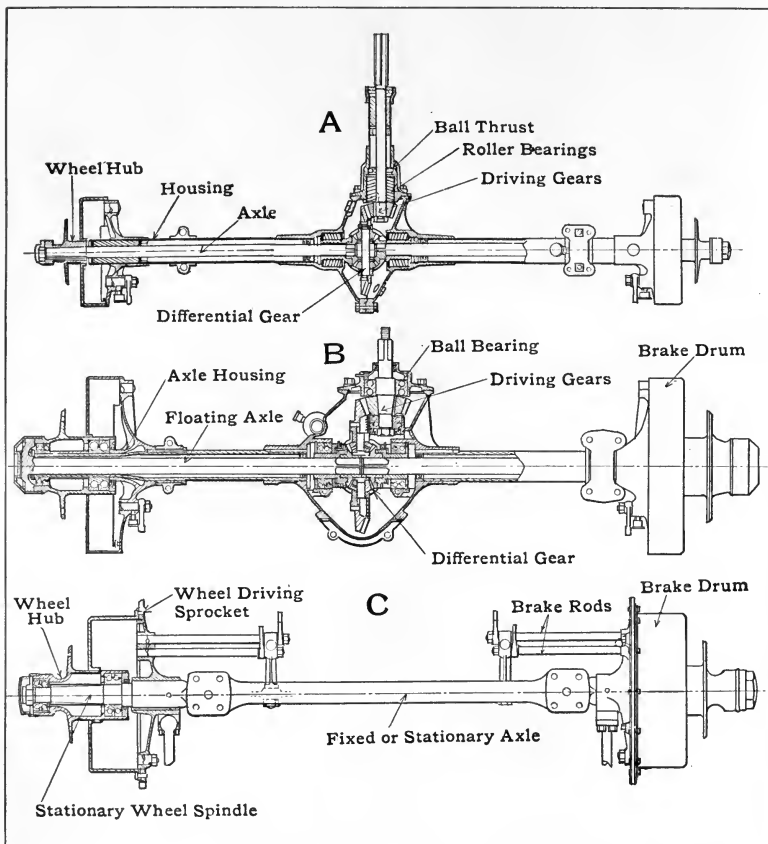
Rear Axle Types Generally Used. A—Live Rear Axle Using Shafts which Transmit Power and also Carry Weight Equipped with Roller Bearings. B—Full Floating Type Bevel-Gear Drive Axle. C—Stationary Axle with Chain Drive to Free Wheels.
